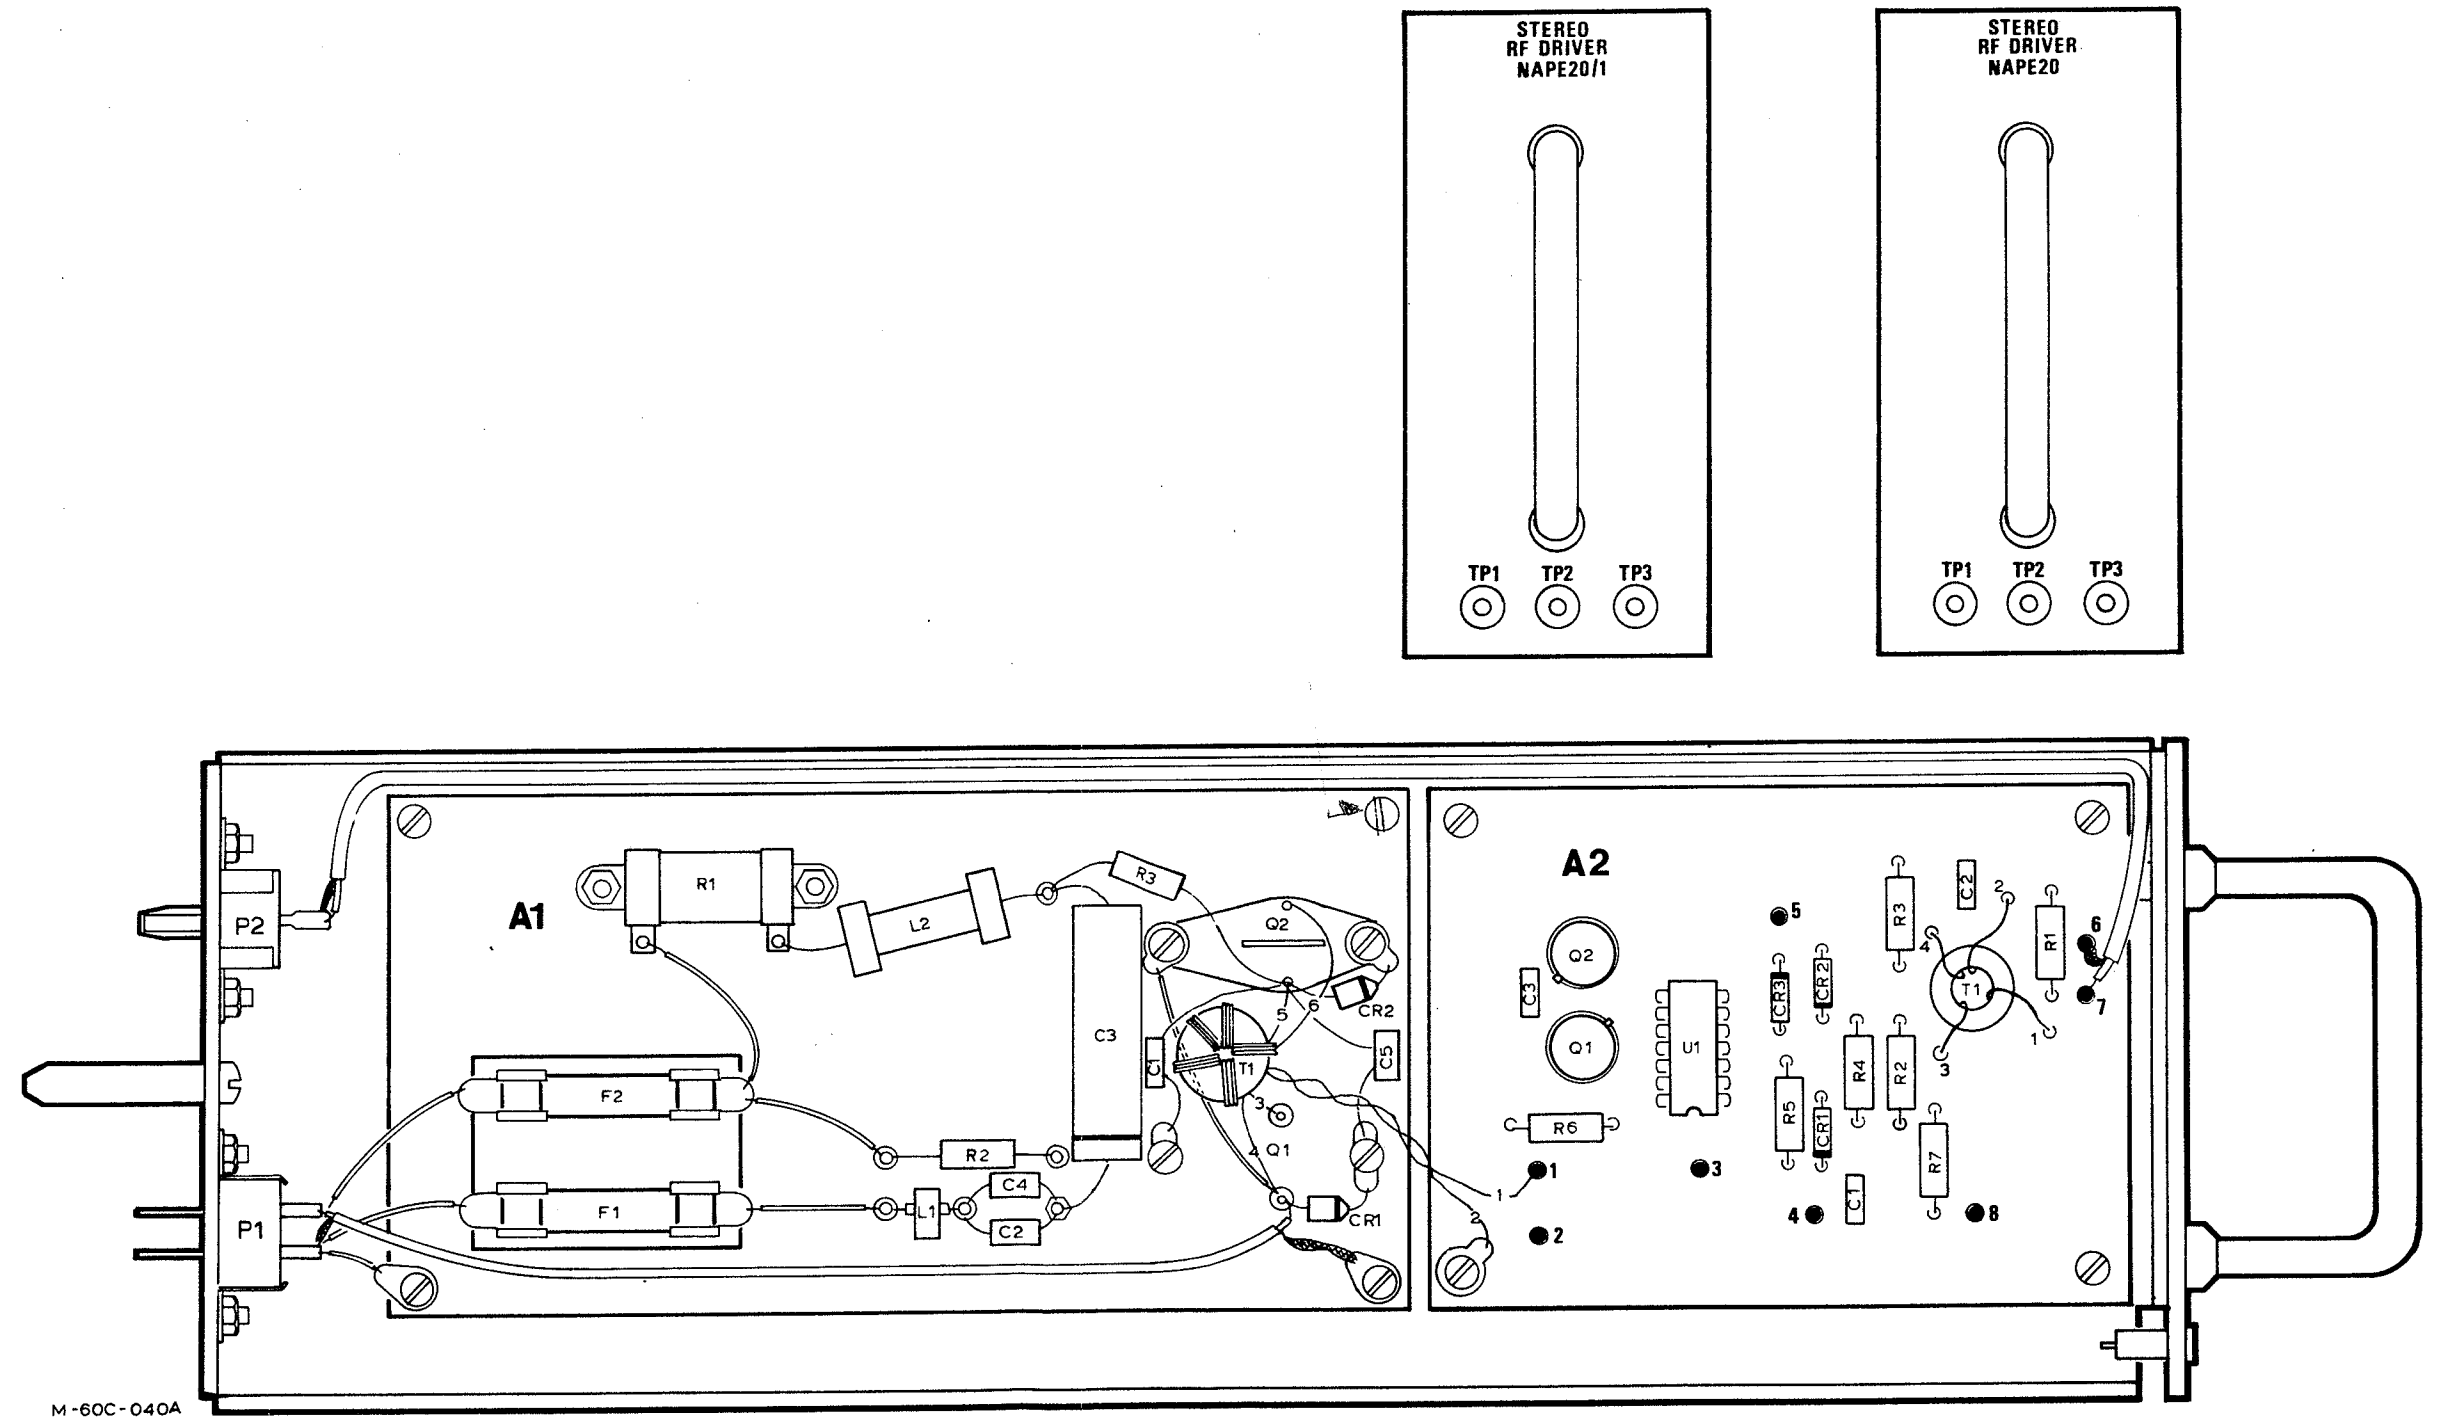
Assembly Detail - NAPE20 Stereo RF Driver Module
